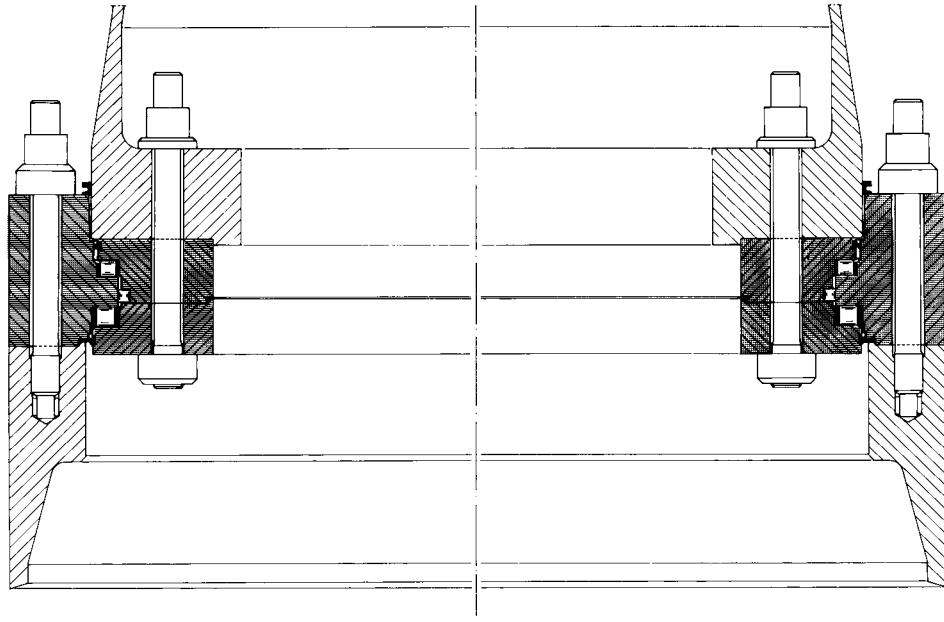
Rotor blade bearings with angular-contact roller bearings in the earlier Swedish WTS-75 (Rothe Erde Schmiedag AG)
